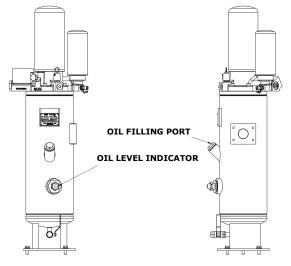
Oil filling and oil level indicator location on air oil seperator tank
